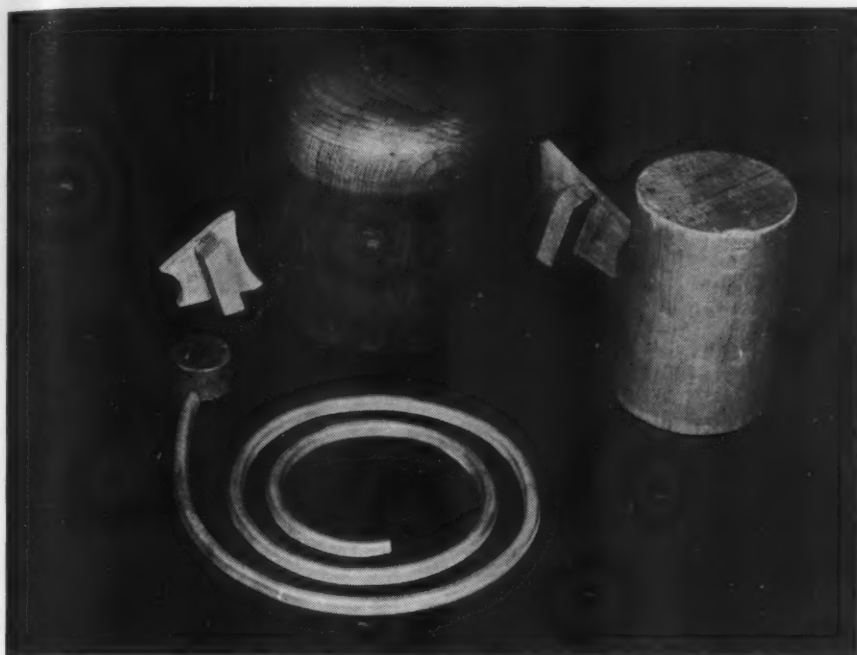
Pattern for Large Fluidity Test Piece Spaced Properly for Ramming in Drag.
